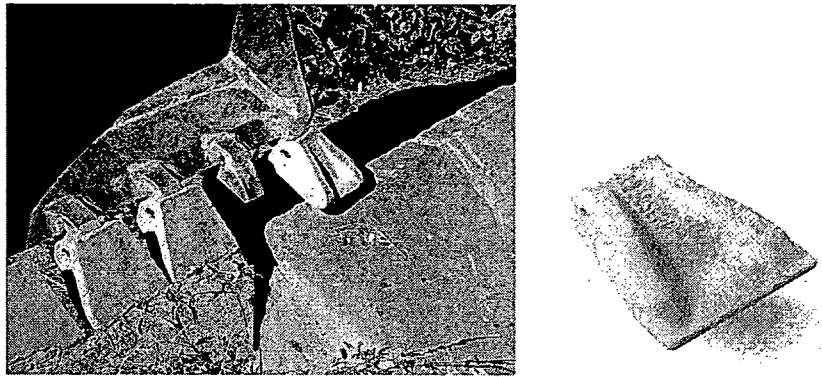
Swamper tooth mounted on the bucket (left); a single tooth (right).
